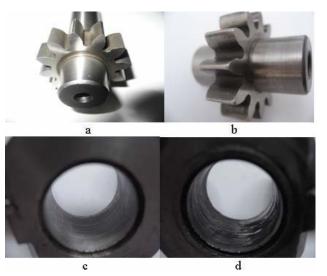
a. View of good gear, b. View of gear with tooth face wear (GTFW), c. View of good journal-bearing, d. View of journal-bearing with inner face wear (BIFW)
